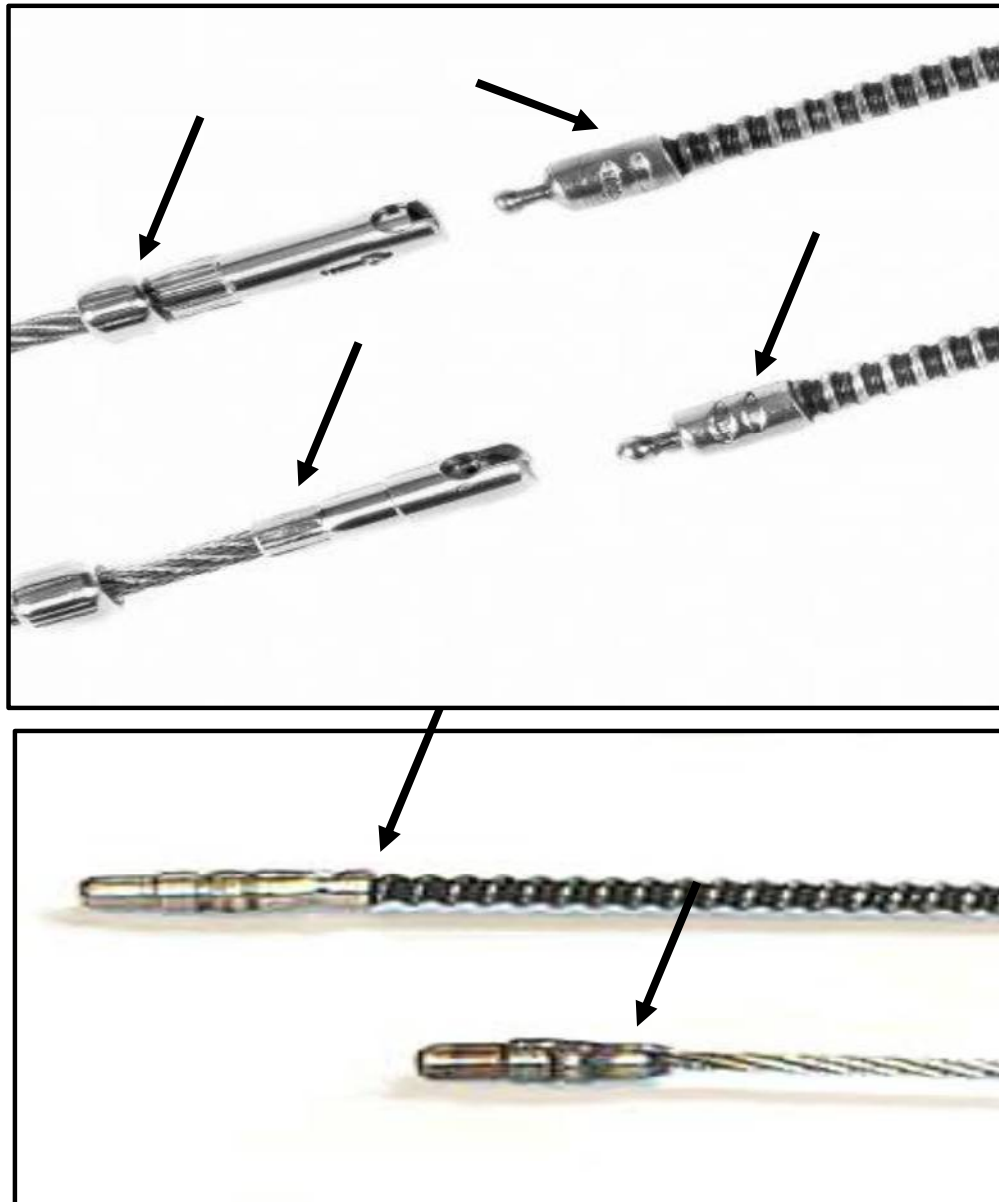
Crimping part (indicated by arrows) of the control cable and source assembly
